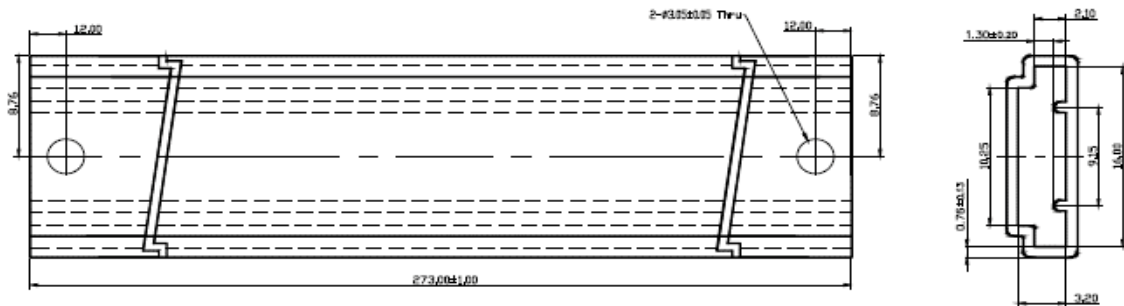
Tube dimensions for L2C5-xxxx1202FH6xx.
